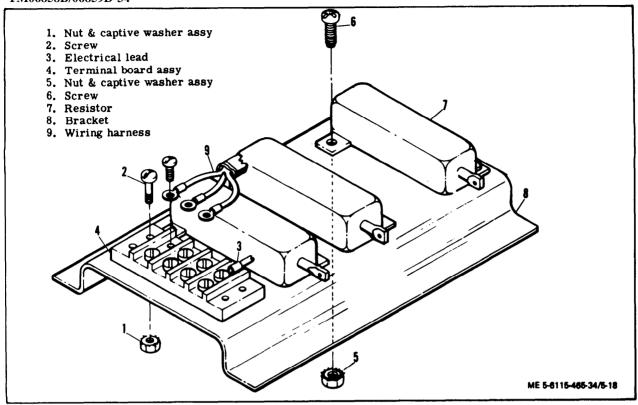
Tactical Relay Resistor Assembly, Exploded View
